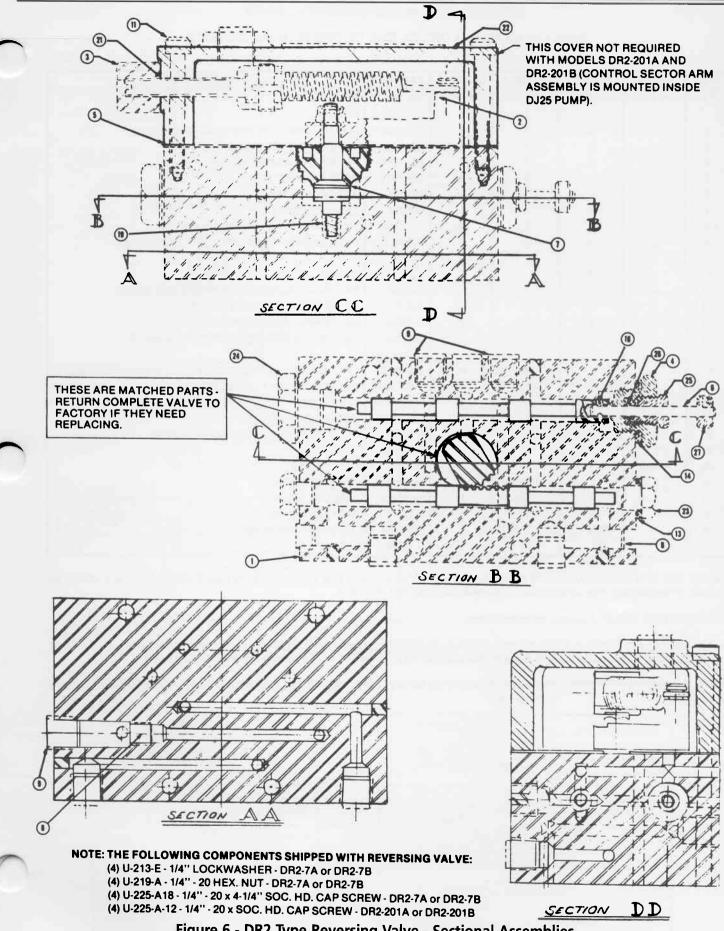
DR2 Type Reversing Valve - Sectional Assemblies.
